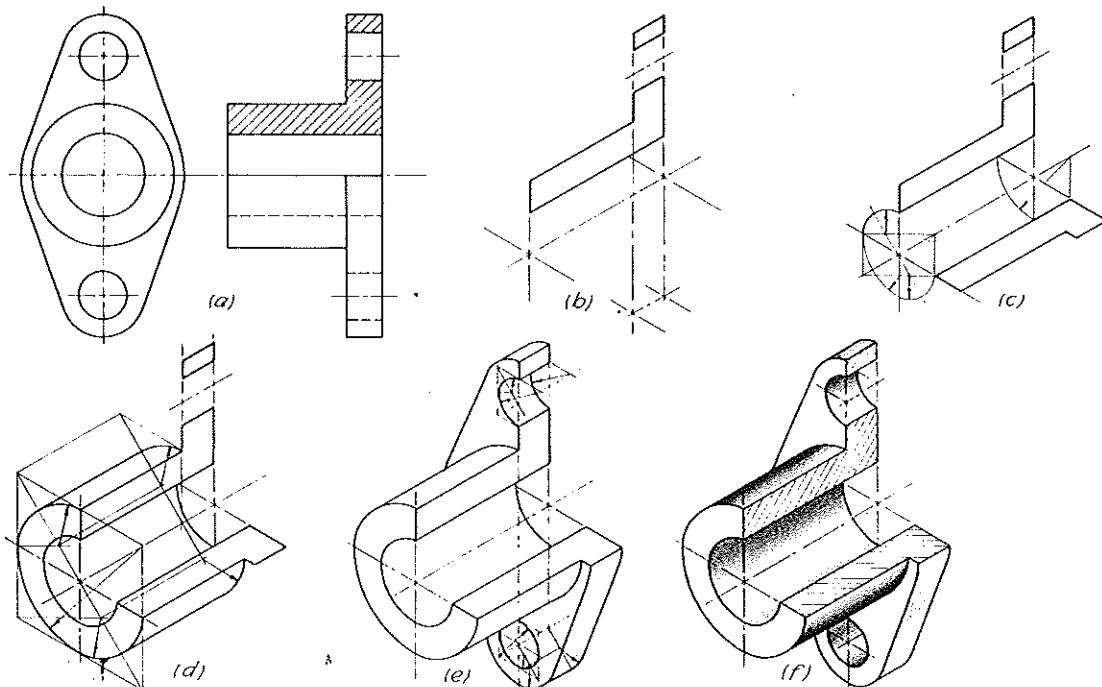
Step-by-step construction of an isometric sectioned view.
